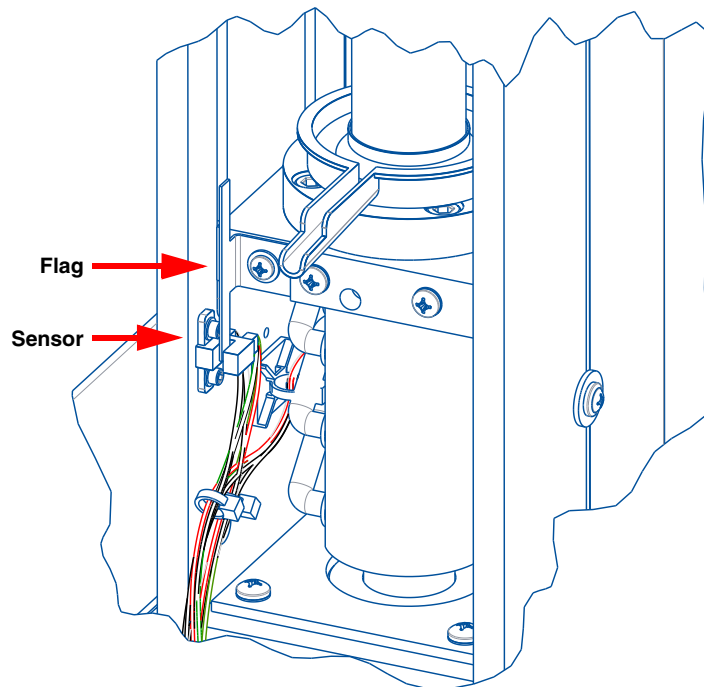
Optical sensor, interrupted by flag (bottom sensor shown, rear tower cover plate removed)
